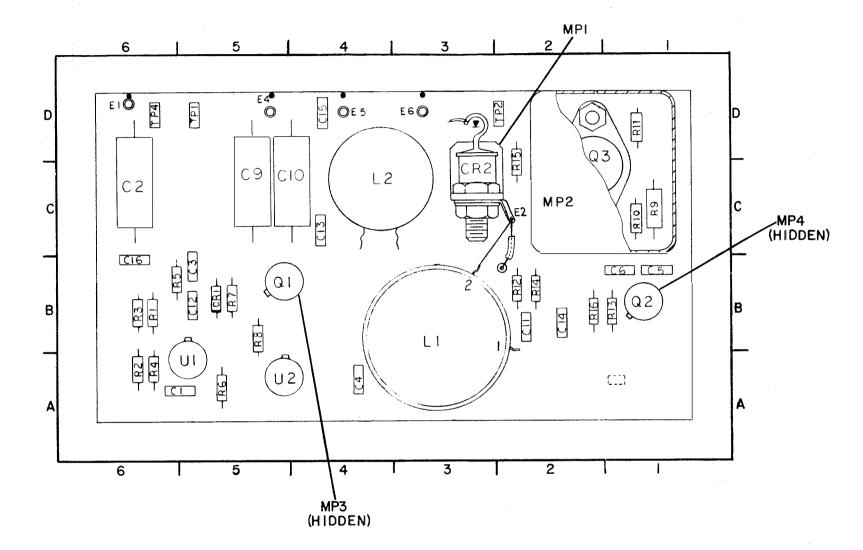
Power Supply Subassembly A2A6A15, Component Locations
